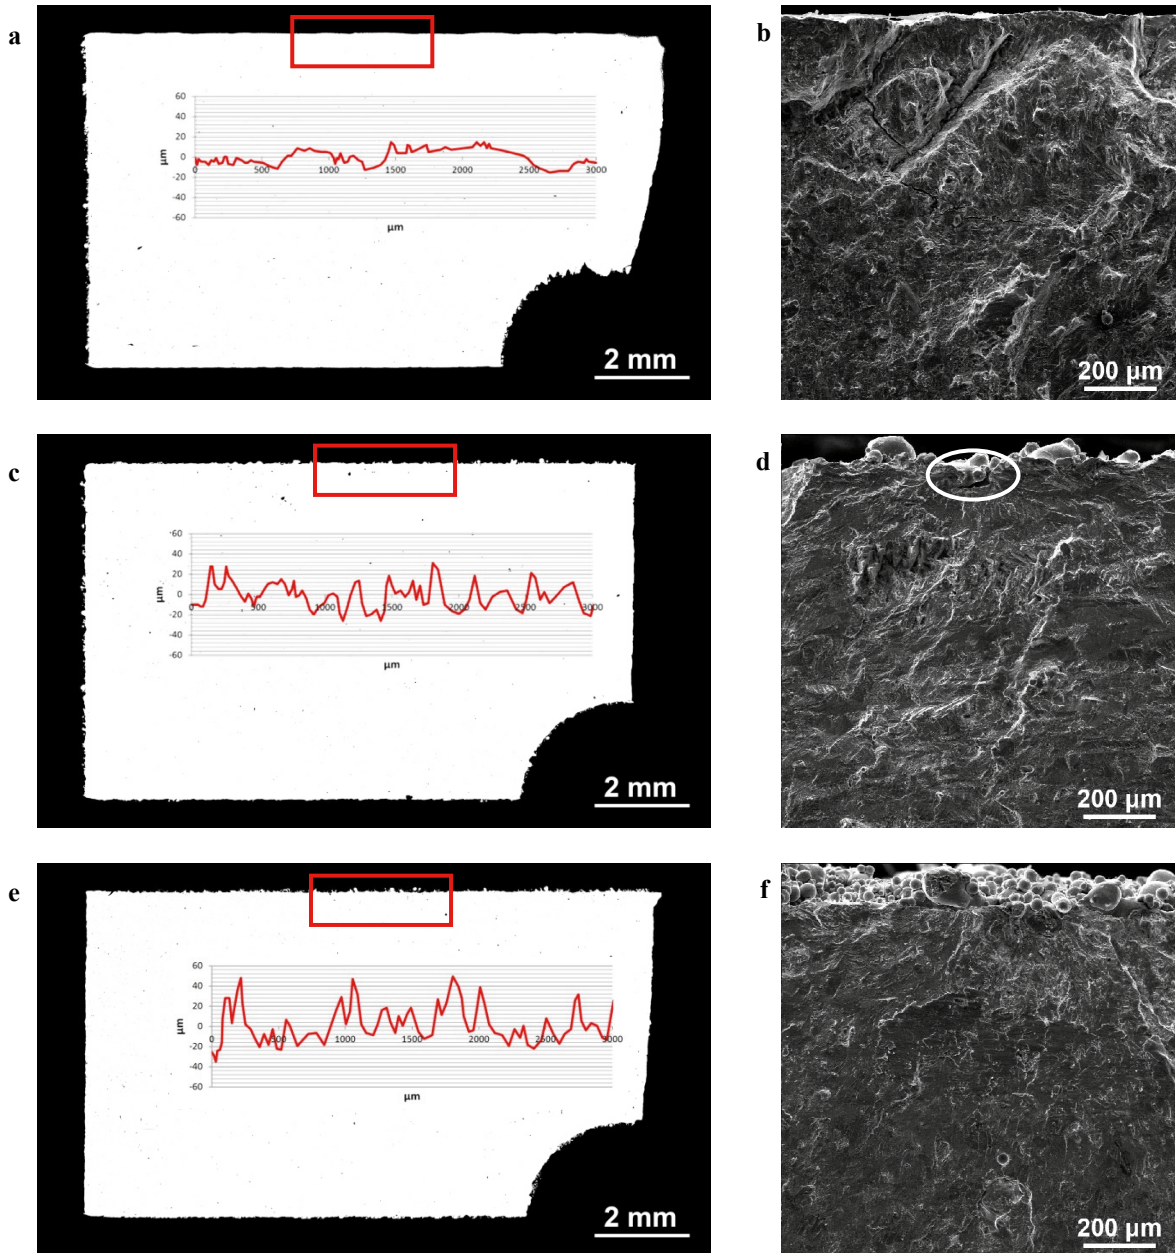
As-fabricated surface roughness of SLM IN 718 specimens (a) A, (c) B, (e) C; fatigue fracture surfaces with initiation places of SLM IN 718 specimens (b) A, (d) B, (f) C.
